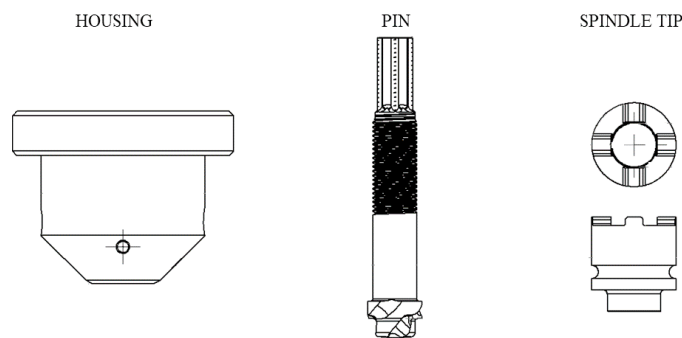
Schematic drawings of the extruder tool parts being imported into Deform 3D™ and employed in the simulations.
